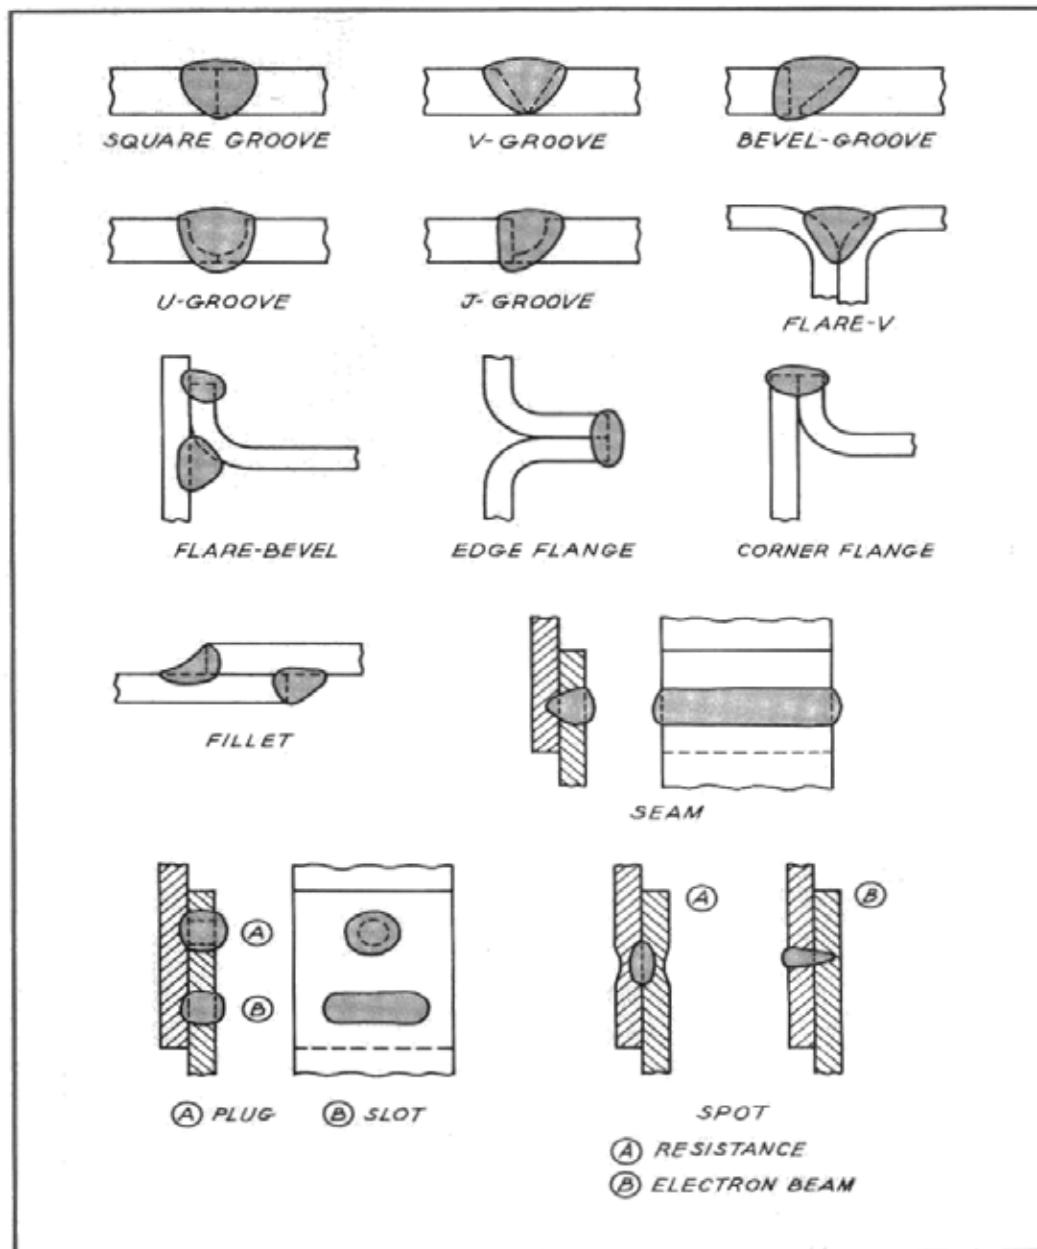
Types of welds. These basic types may be intermixed on a single part if desired.
